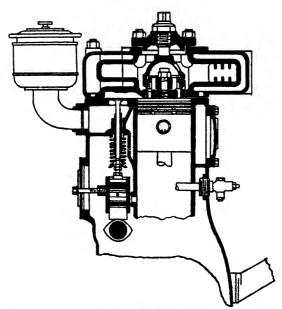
Cross section of vertical single-acting machine with mechanical inlet valves. (Courtesy of Schramm, Inc.)
